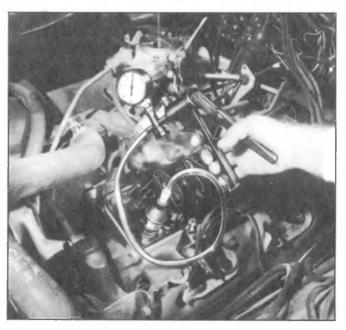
A-29V--Checking Valve Stem Oil Seals (Small V-8)
